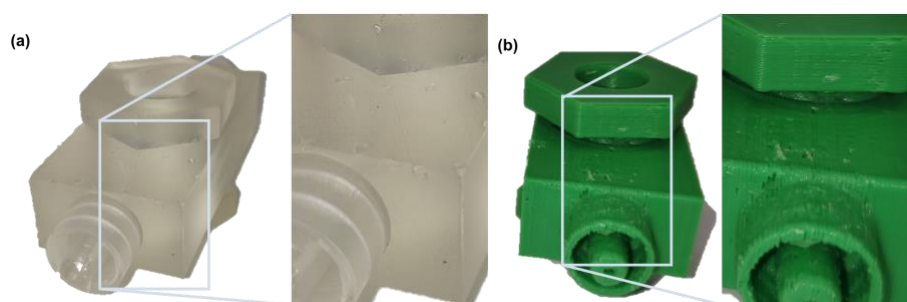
Images of the millifluidic device printed by (a) stereolithography and (b) fused deposition modelling. The print produced by SLA shows a print with a smooth surface finish whereas the FDM printed device has many defects and the layers of the print can clearly be seen (insert shows magnified image for clarity).
